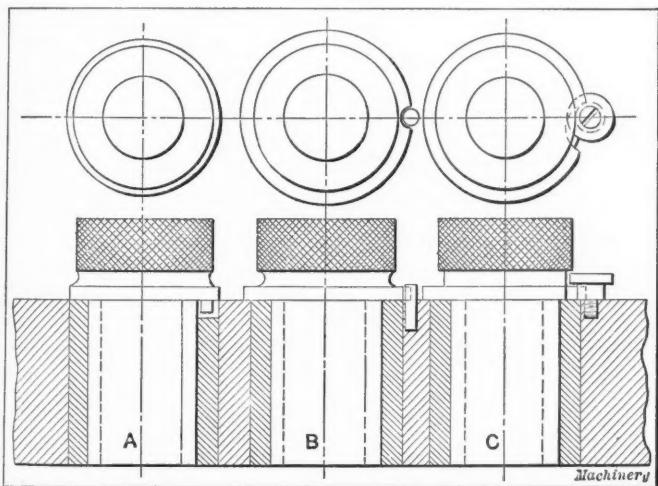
Methods used for Preventing Jig Bushings from Turning
